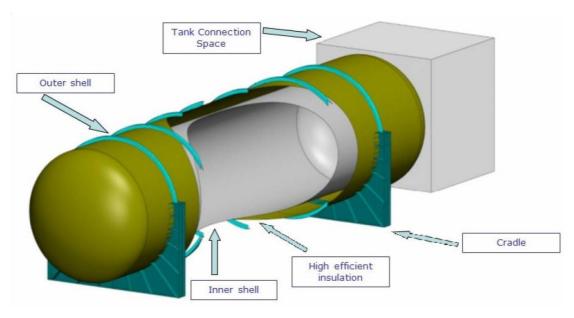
3-dimensional drawing of a double-shelled pressurized LNG tank (type C) designed by M.E.S for Wärtsilä. (M.E.S., 2010)
